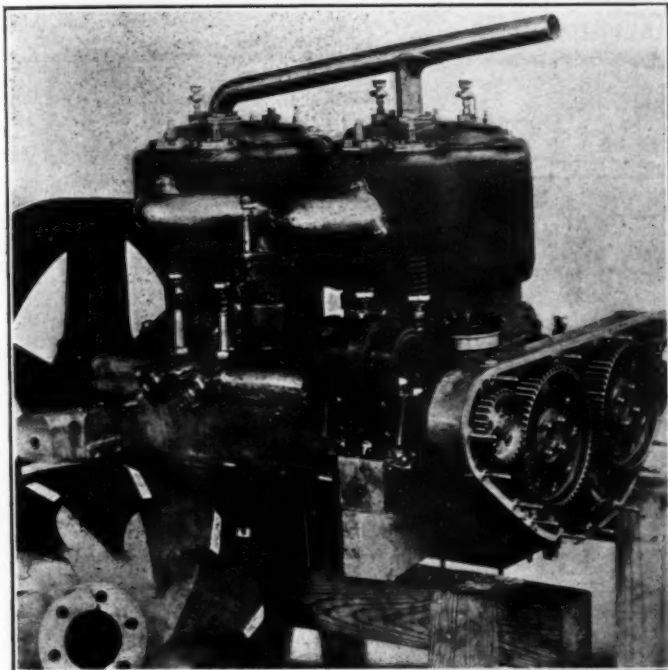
Orson motor with gear wheel case removed and showing part of flywheel
